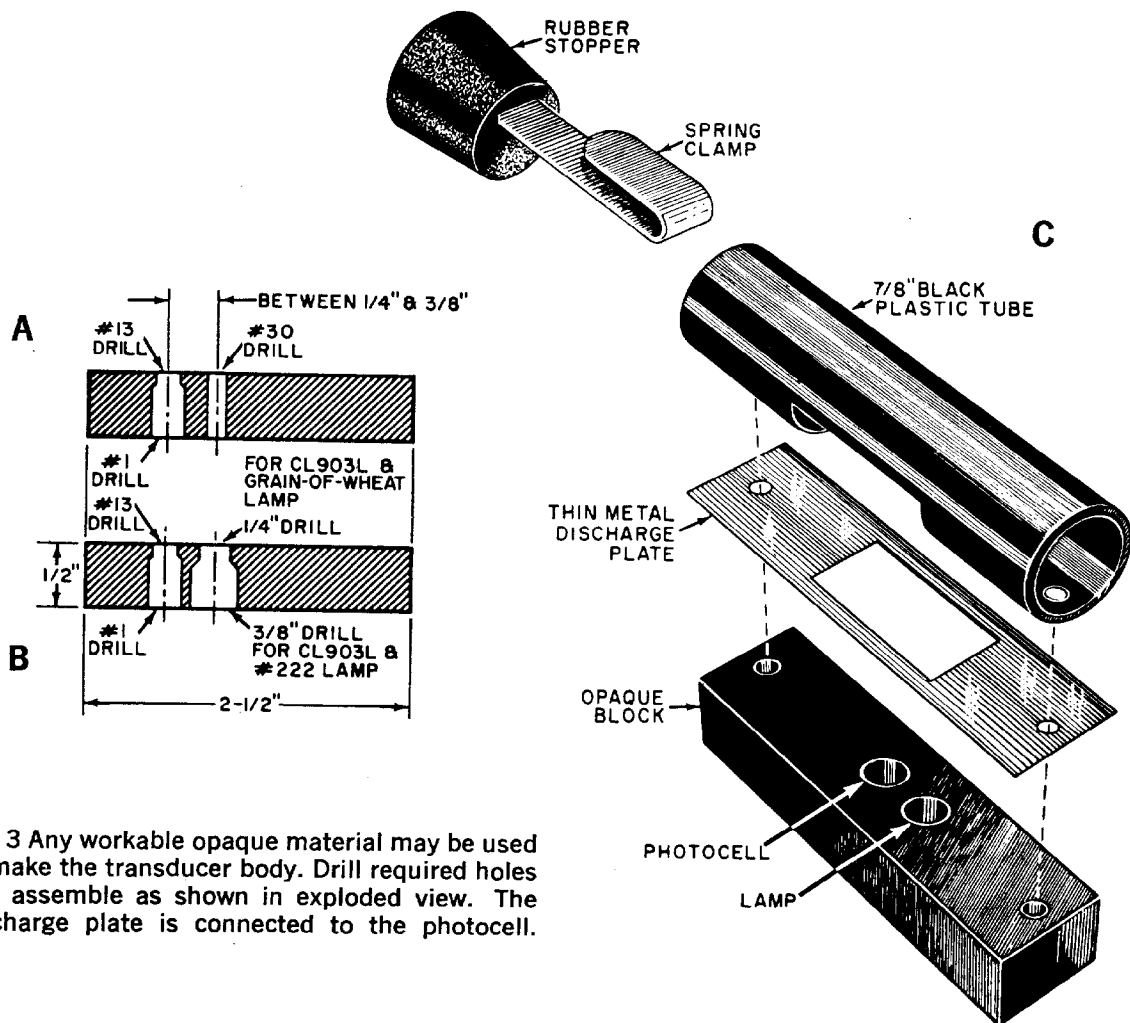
Any workable opaque material may be used to make the transducer body. Drill required holes and assemble as shown in exploded view. The discharge plate is connected to the photocell.
